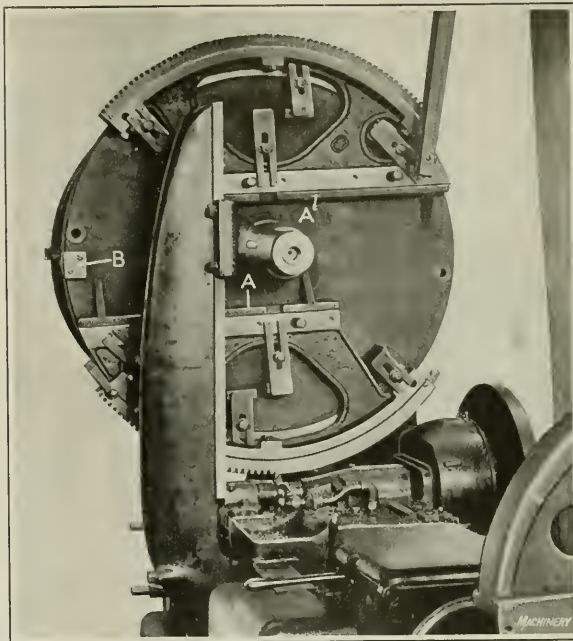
Cutting Segment Gears which are held on a Special Fixture
